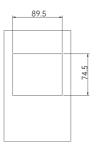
Mounting hole dimensions of the operating panel mounting base
